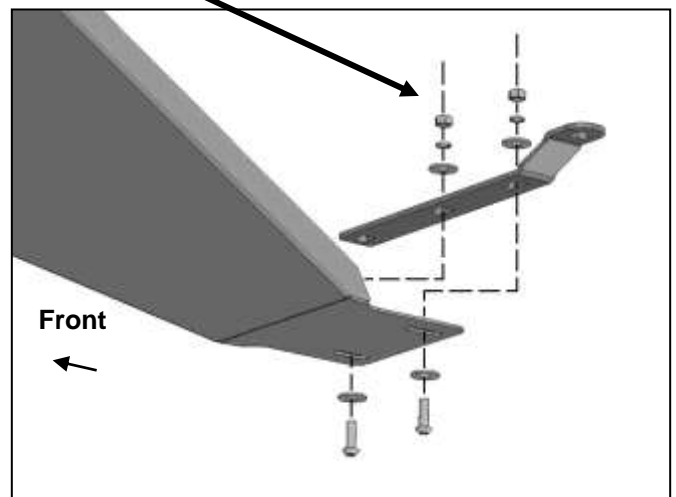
Attach MD1 Skid Plate to back of Bumper
